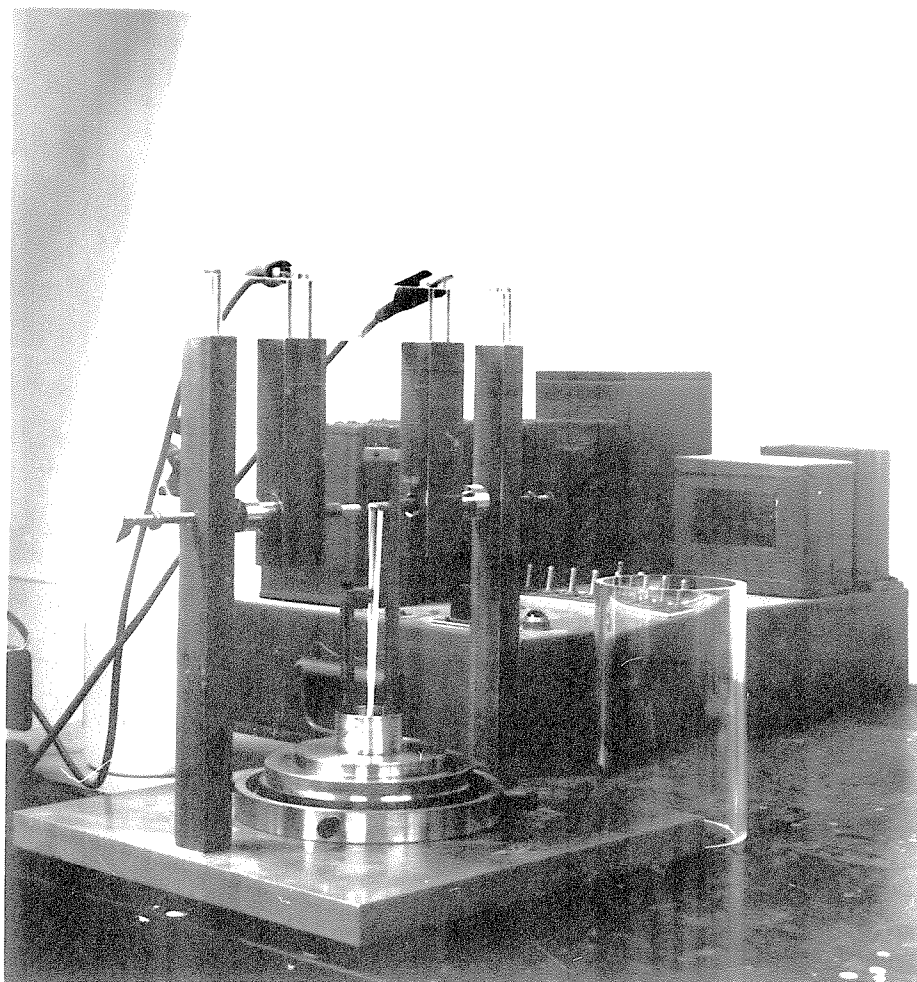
Spotwelding jig and spotwelding power supply.
